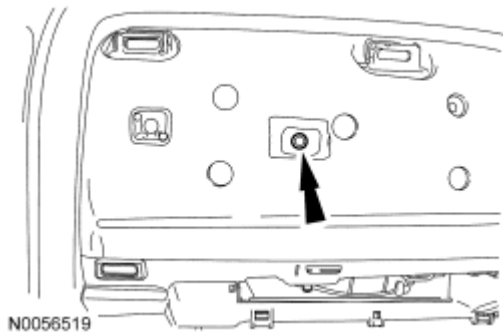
Locating Screw On LH Duct Assembly Bracket
